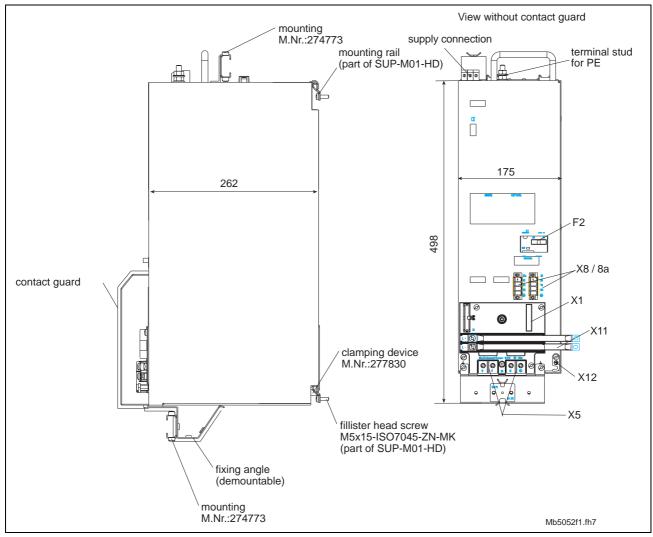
Dimension drawing HZF01.1-W025N / HZF01.1-W045N
